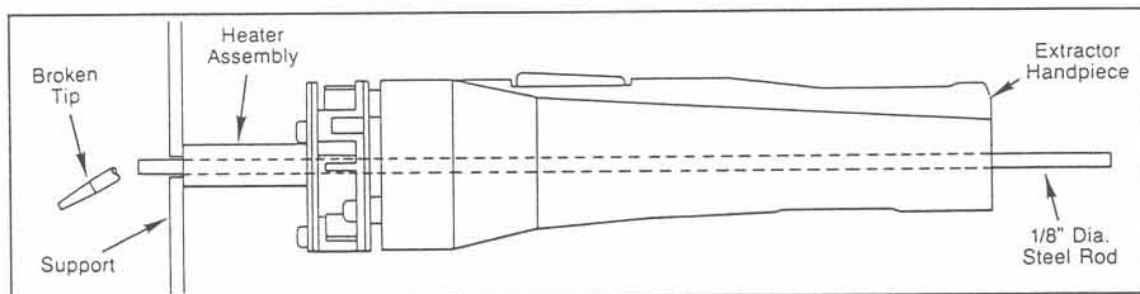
REPLACEMENT OF JAMMED OR BROKEN EXTRACTOR TIPS
